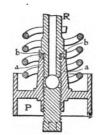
Section of Crosby Indicator Spring and Piston.
